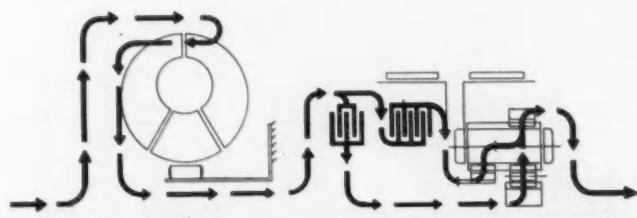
All parts rotate together in High so that direct drive results through the gear box
